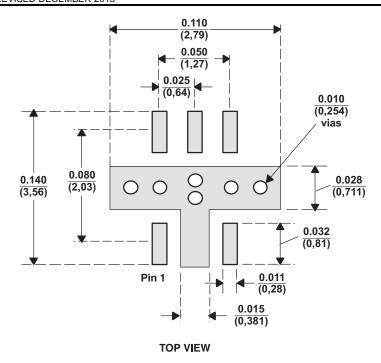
THS9000 Recommended Footprint dimensions are in inches (millimeters)
